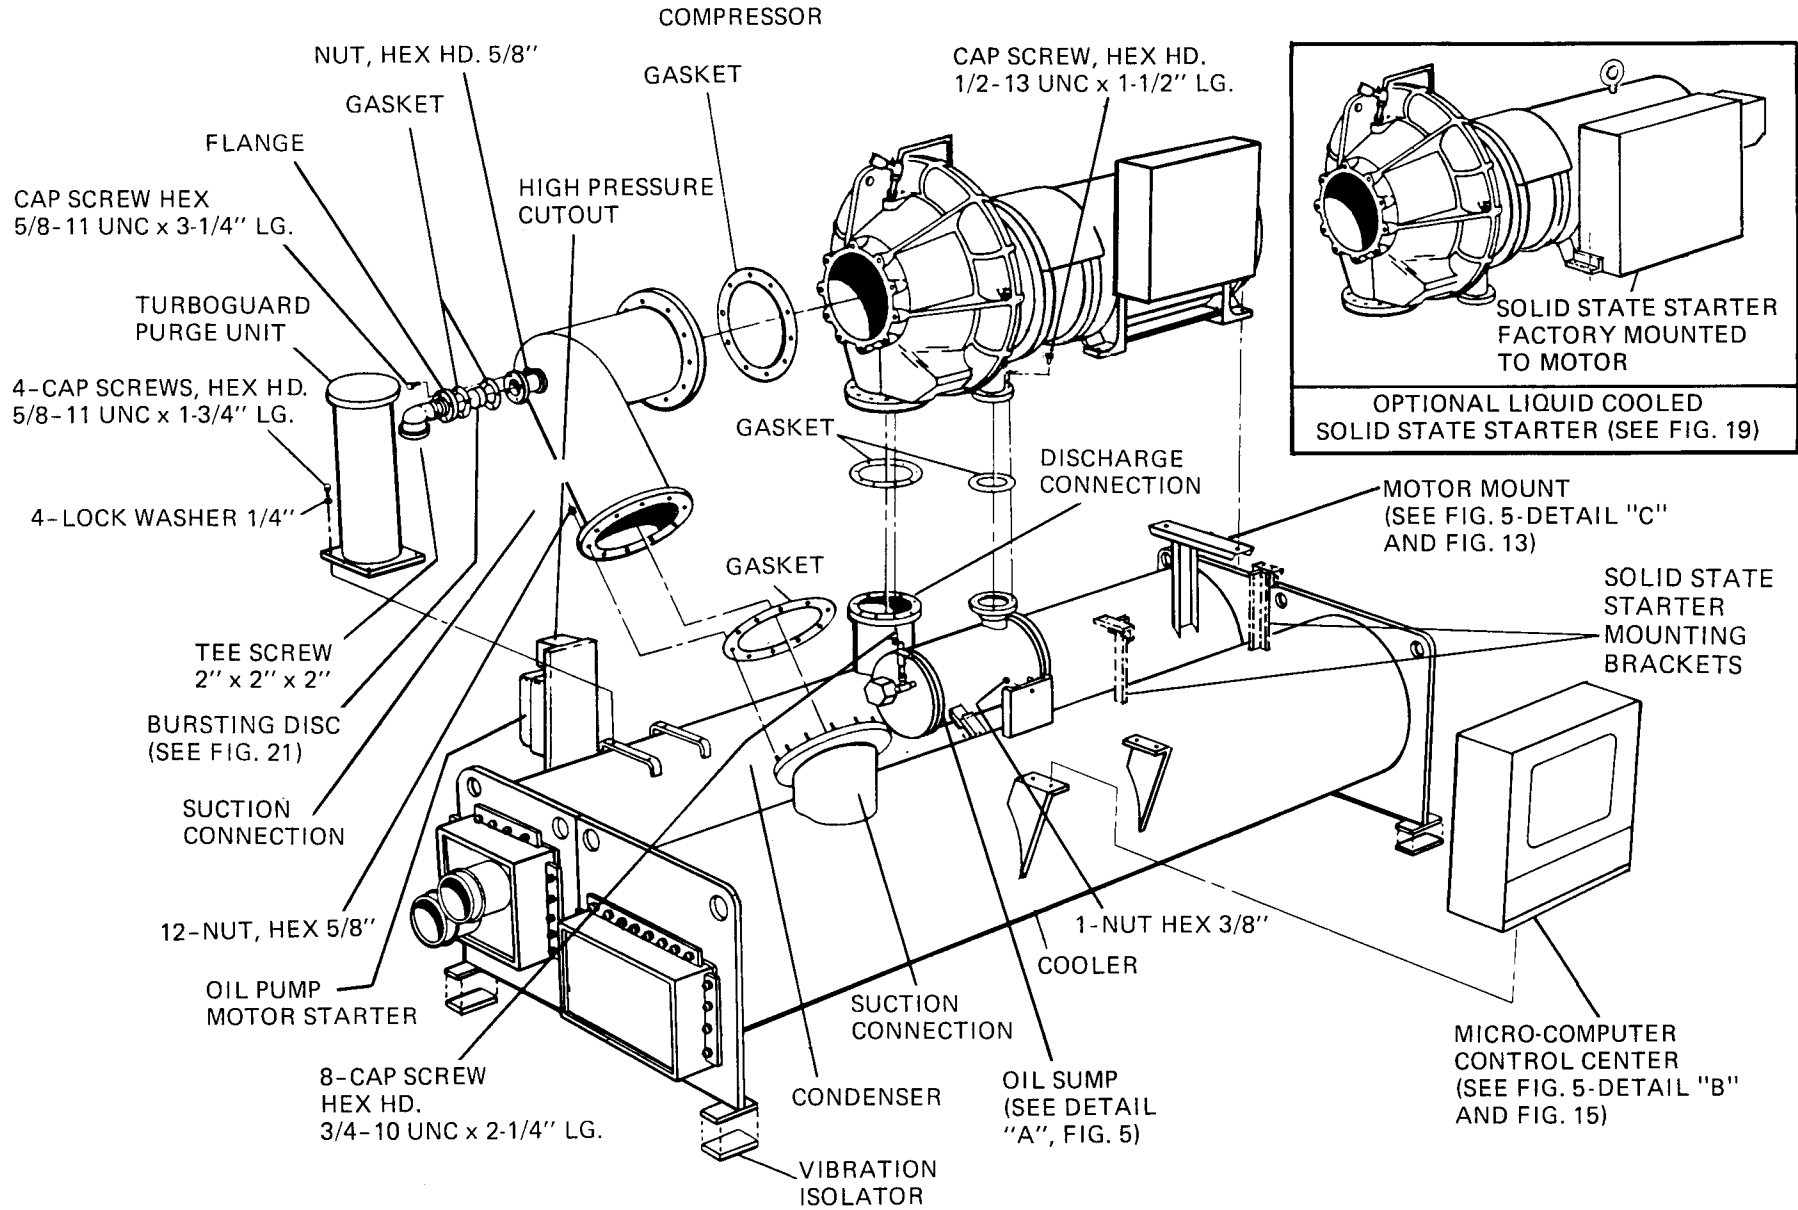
MODEL YT CODEPAK EXPLODED VIEW ASSEMBLY (YT A1 A1 B1 THRU F3 S3 C2)
